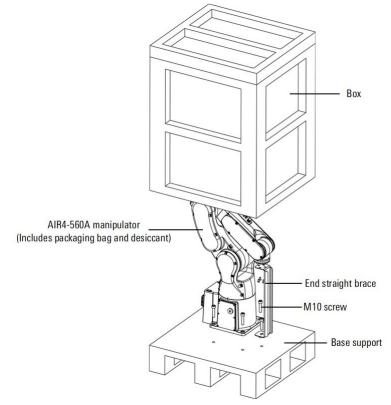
Composition of the AIR4-560A manipulator packaging box
